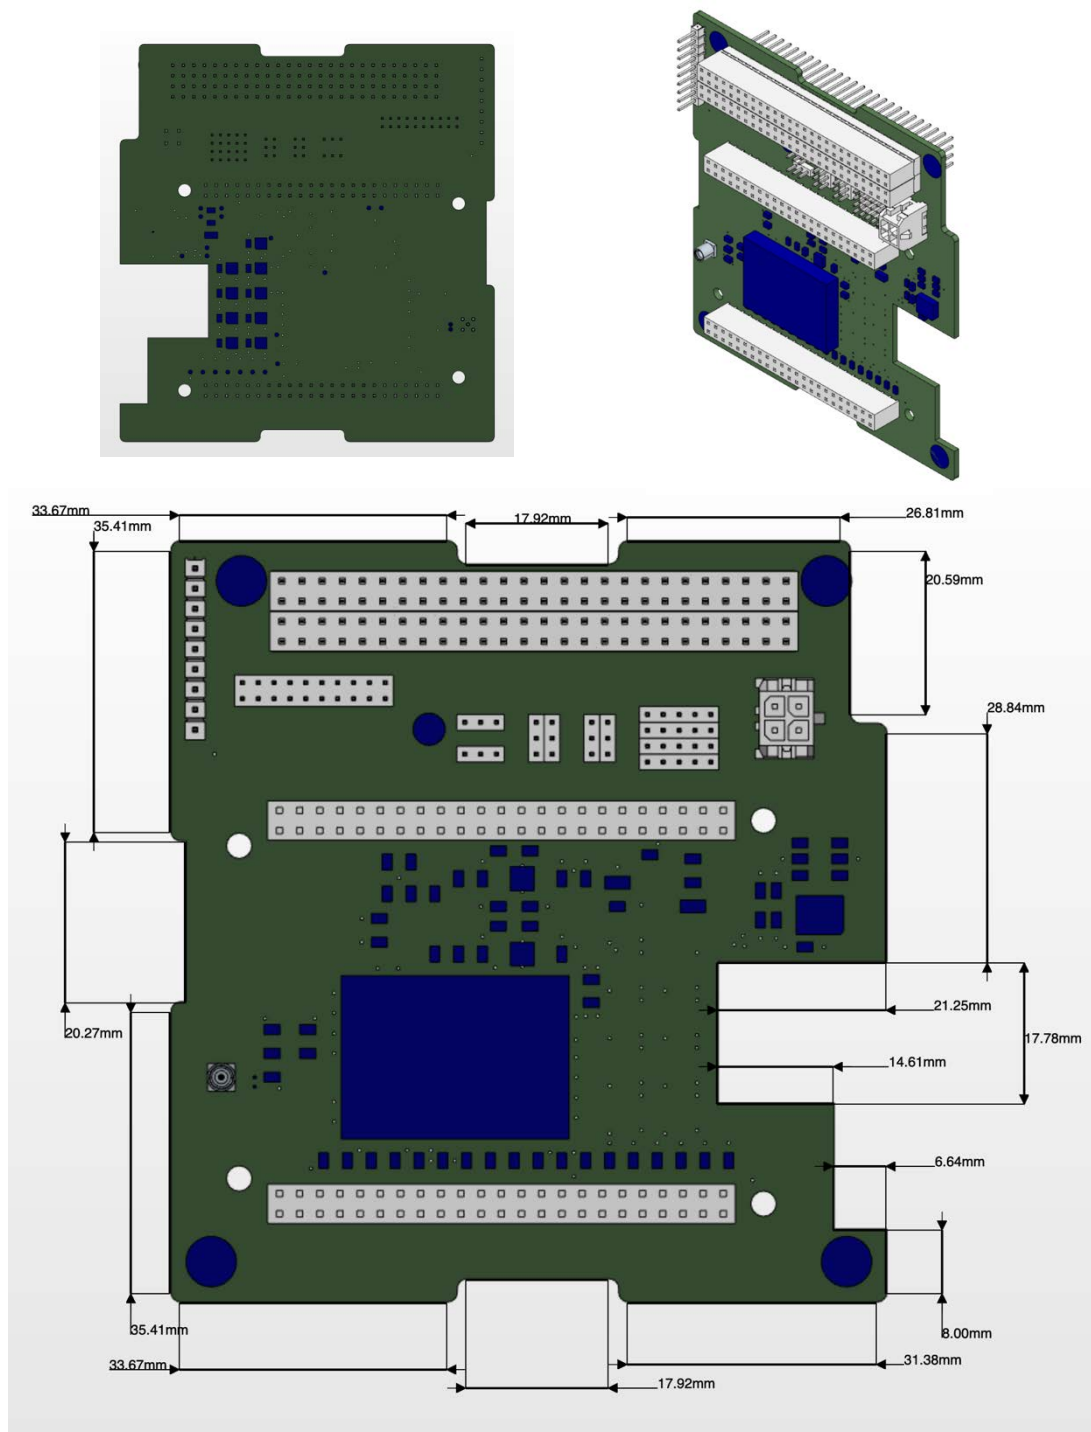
STX3 PC104 Board Dimensions — Part 2.
